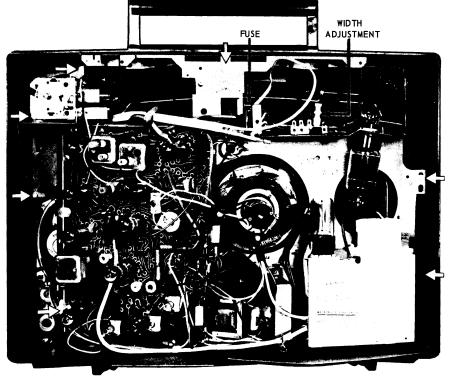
Rear view of chassis, showing location of screws for chassis removal.
